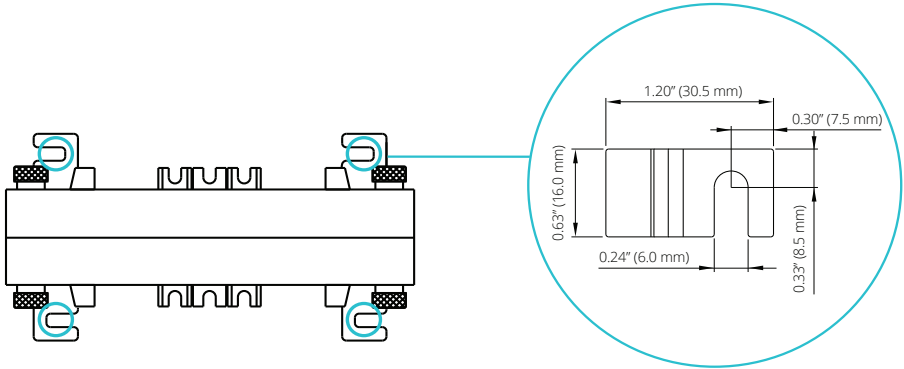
Top-View of the CT and Mounting Brackets with Dimensions of the Mounting Clips
